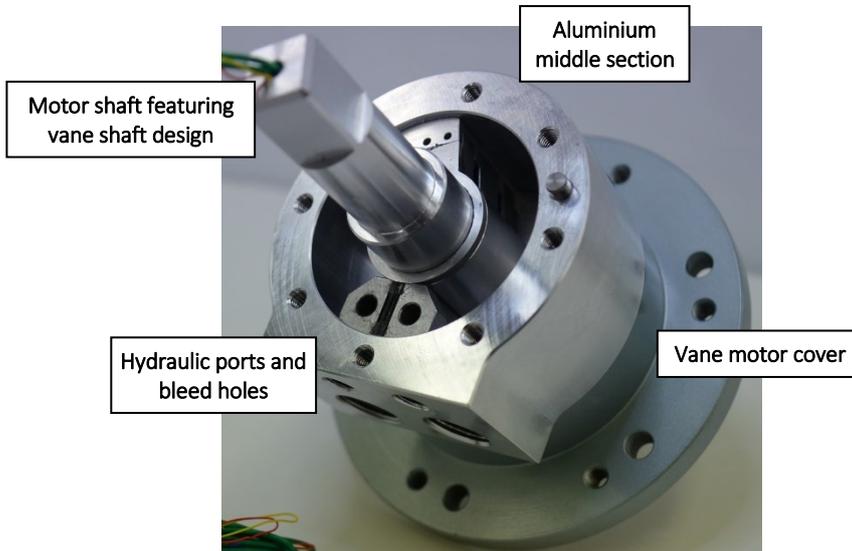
Retrofitted vane motor showing the new shaft featuring the vane hole design
